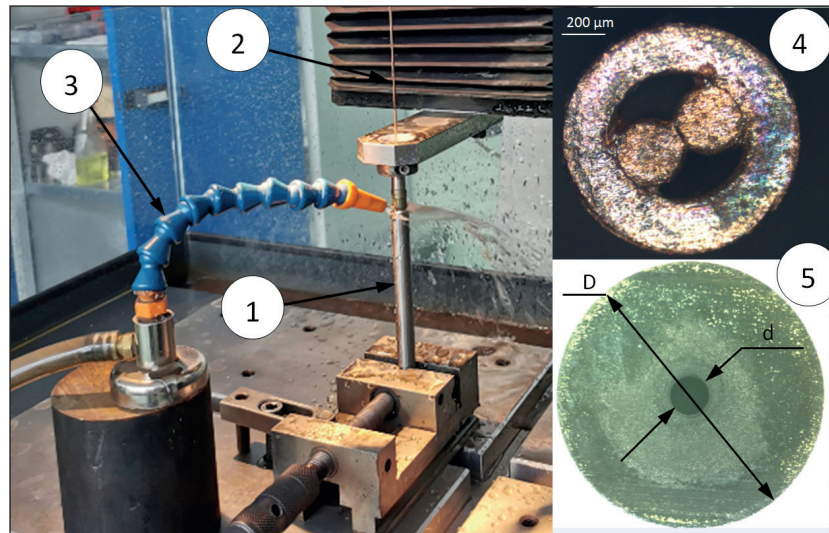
Stand test for EDM drilling: 1- end mill blank, 2- copper electrode, 3- coolant, 4- electrode top view, 5- eroded hole view, D- blank diameter, d- diameter of eroded hole
